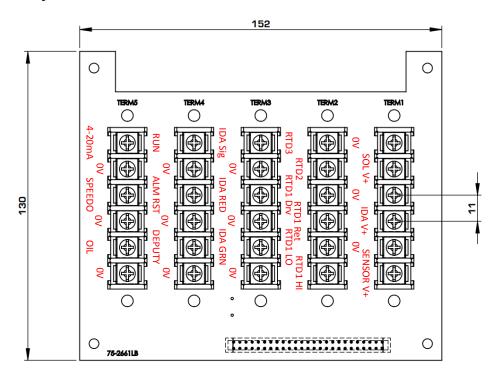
Terminal Layout for Diesel Machine Monitor
